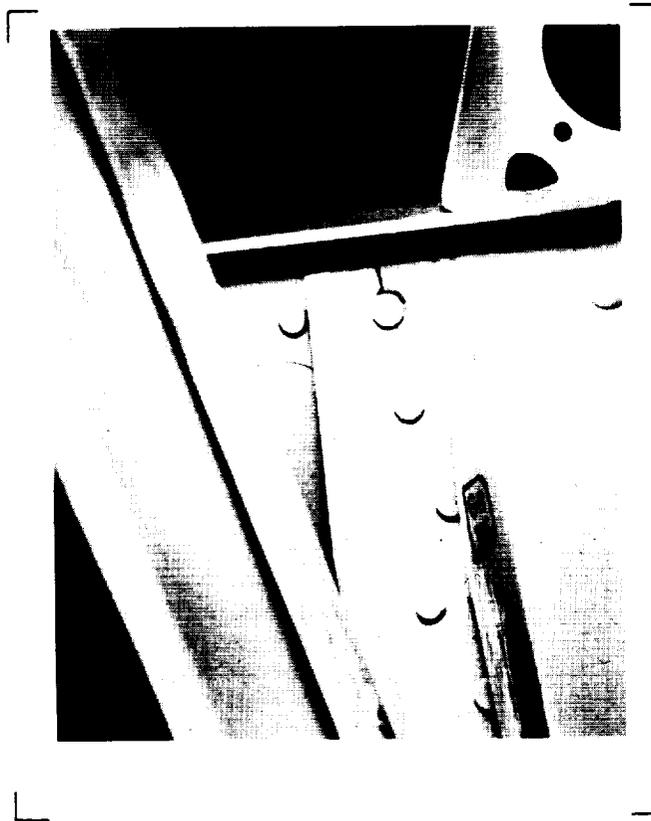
Interrivet cracking on a channel made of type 7075-T651 aluminum alloy.
